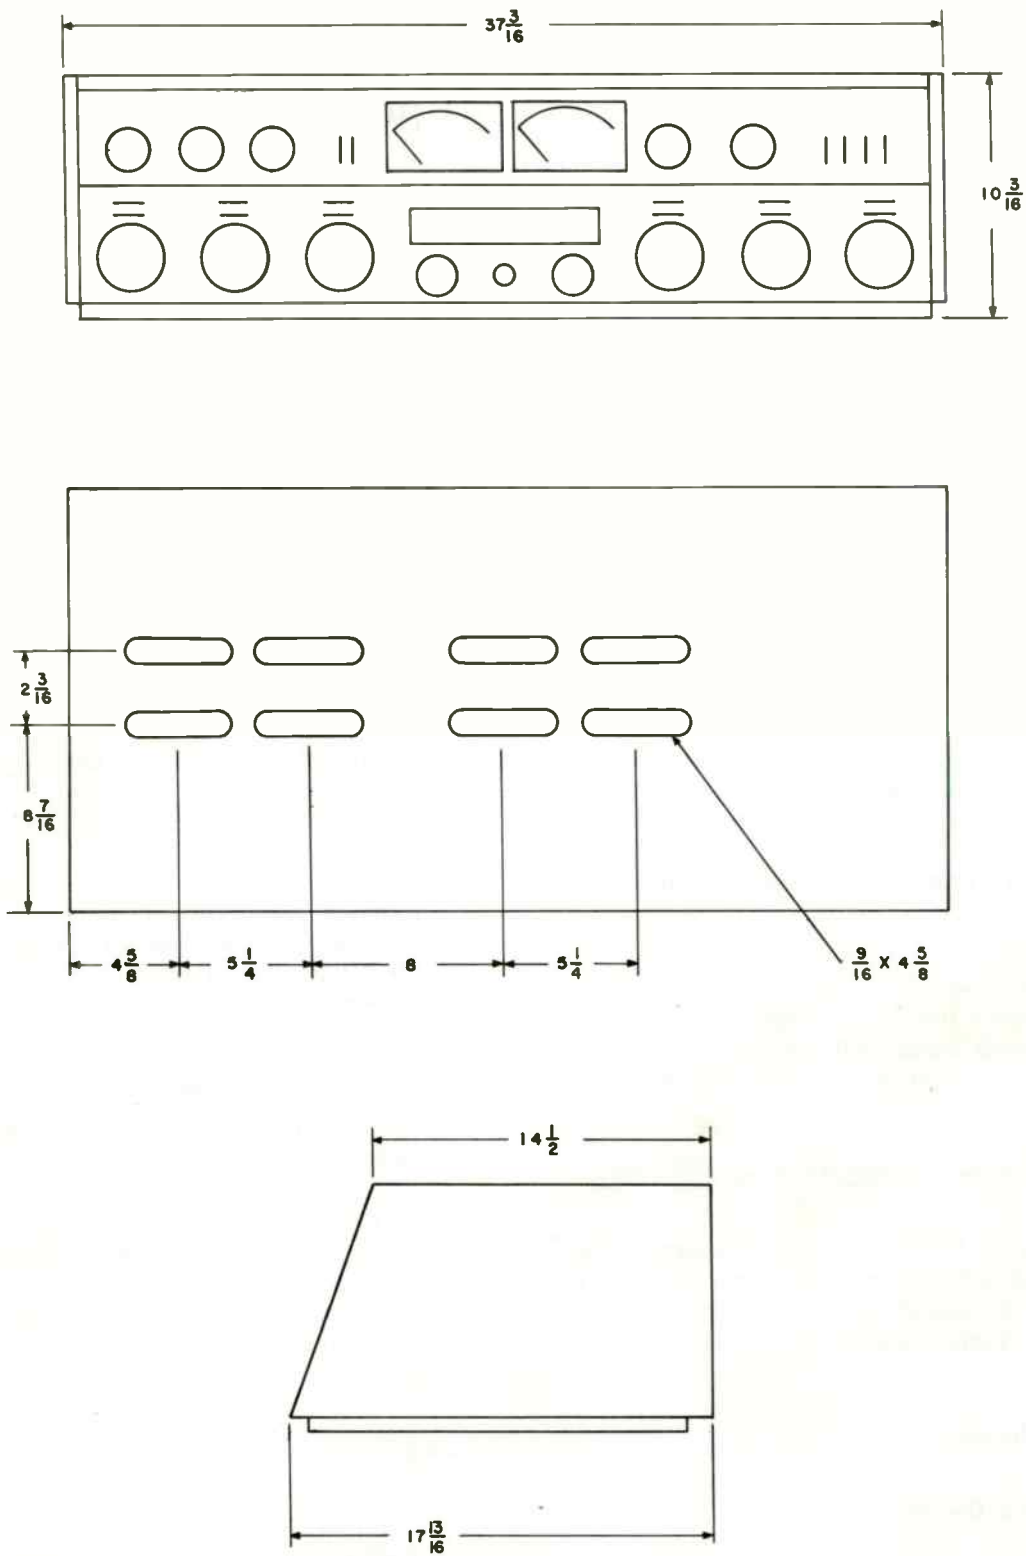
212S-1 Stereo Console, Outline, and Dimension Drawing
